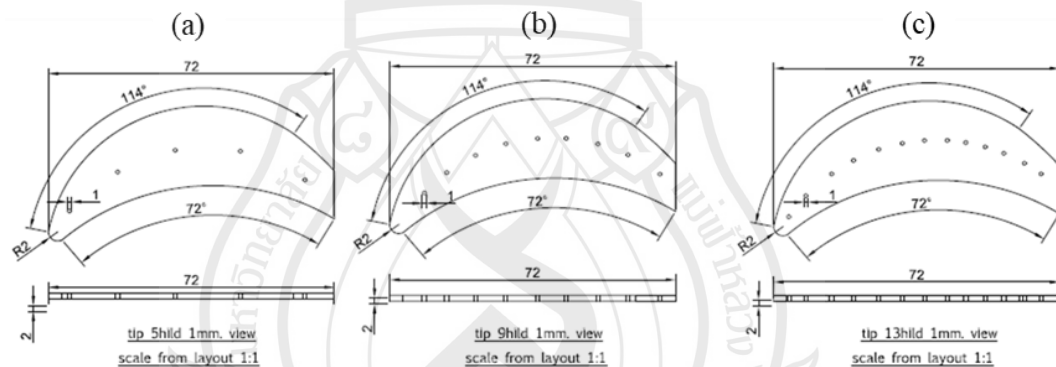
Tip cap cooling geometries (a) 5 holes, (b) 9 holes and (c), 13 holes with a diameter of 1 mm
